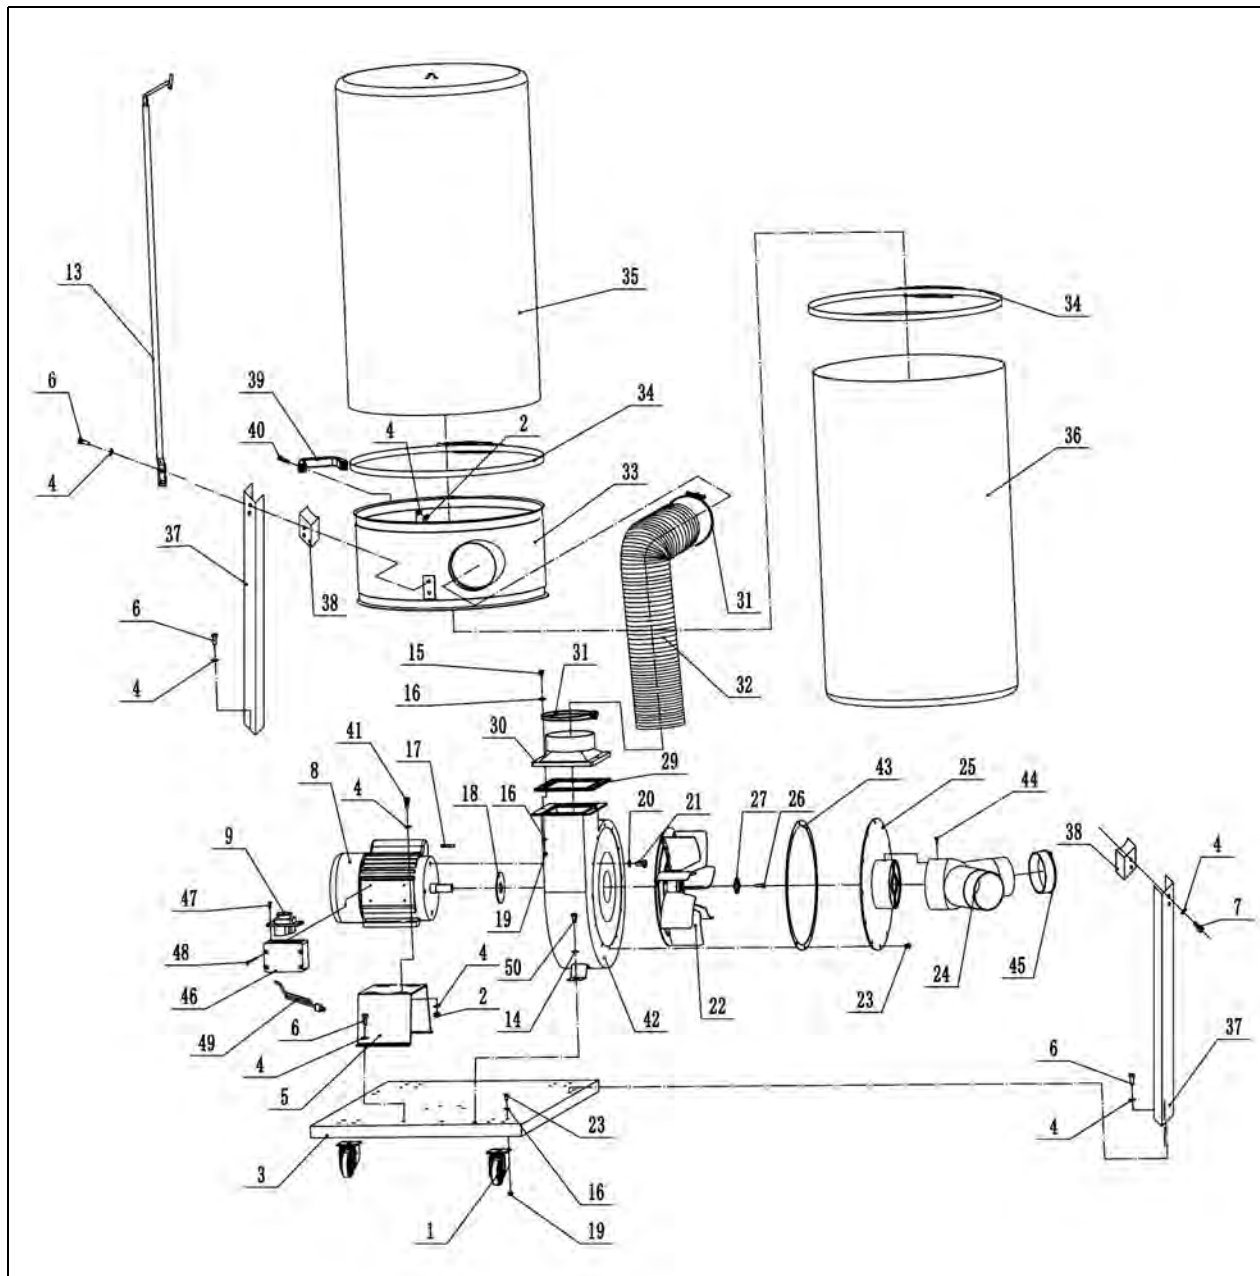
Spare parts drawing SAA 2001/ SAA 2003
